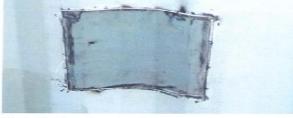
/ Full penetration of continuous panel insert weld to interior side
